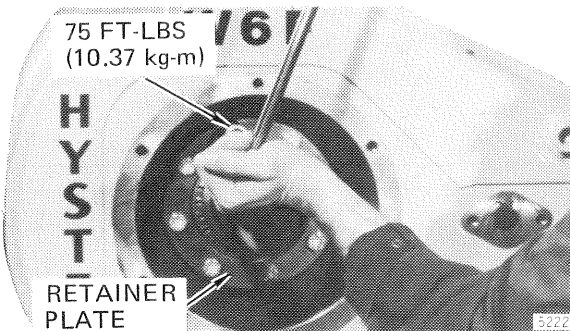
INSTALLATION OF DRUM AND DRUM SHAFT (Sheet 2 of 4)
